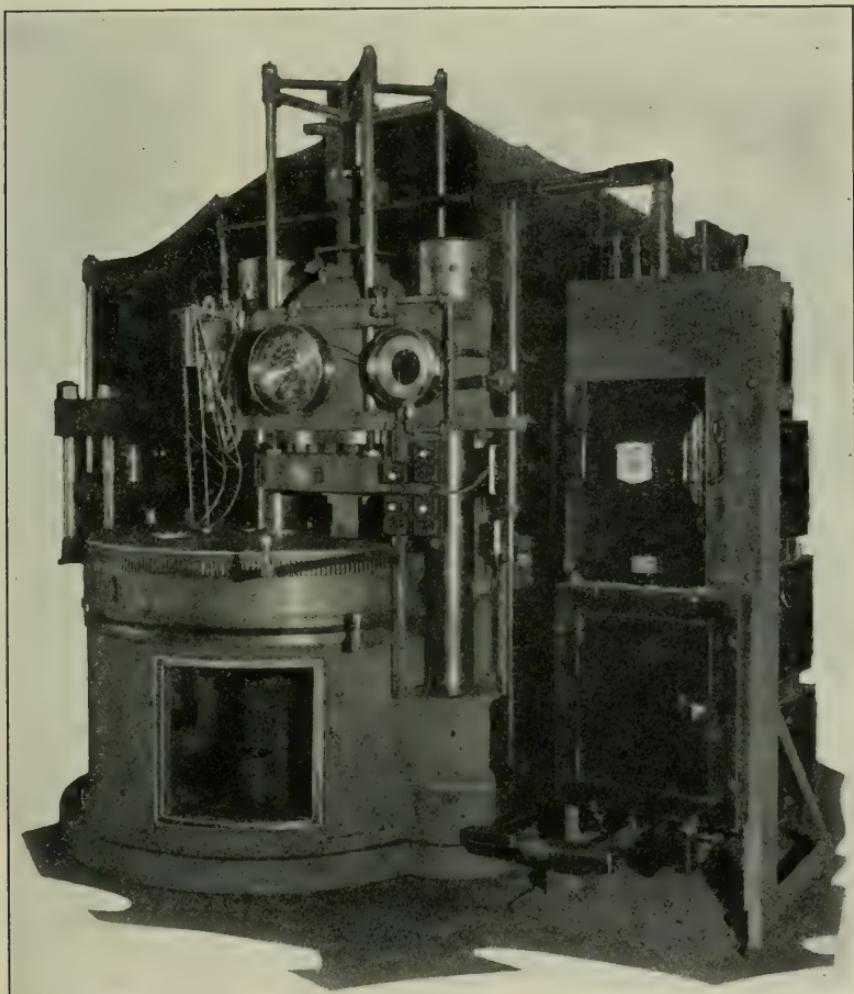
SEMI-AUTOMATIC BRUSH MOLDING MACHINE
